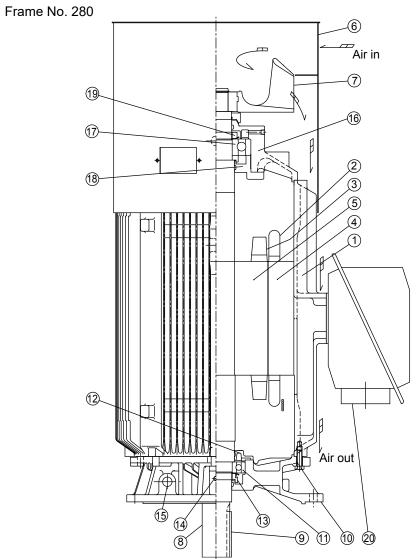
Section Drawing of Vertical flange mount (Frame size 280)
